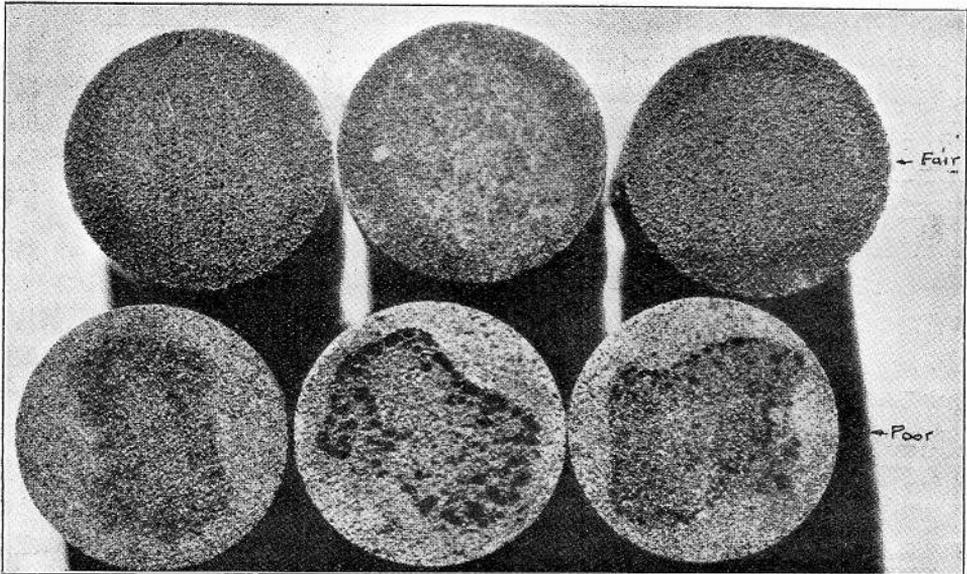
A Simple Method of checking Segregations and Non-uniform Structures in Welding Wire. Those shown in the Top Row will pass Standard Requirements, while the Defects shown in the Bottom Row show Segregations due to a Non-uniform Structure.
